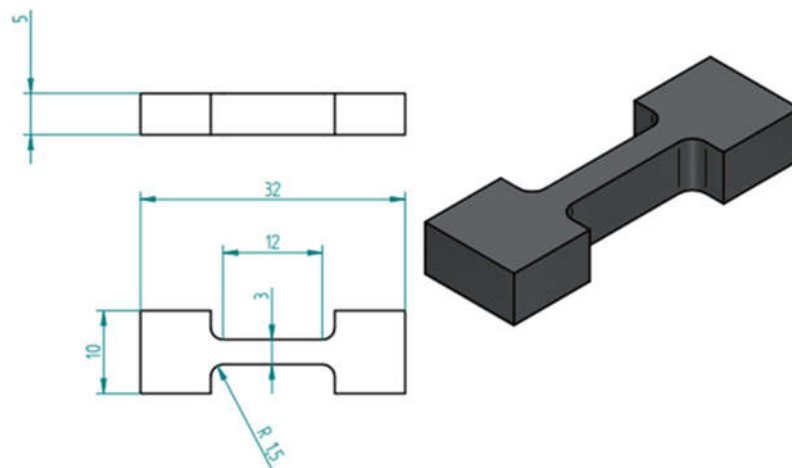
Dimensions of the tensile specimen for tensile testing.
